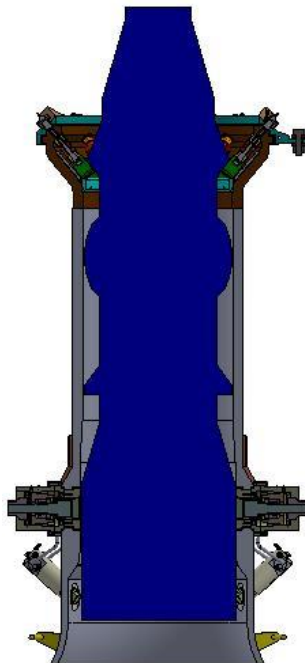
Unified Diverless Support Tube Assembly main parts for rigid riser
